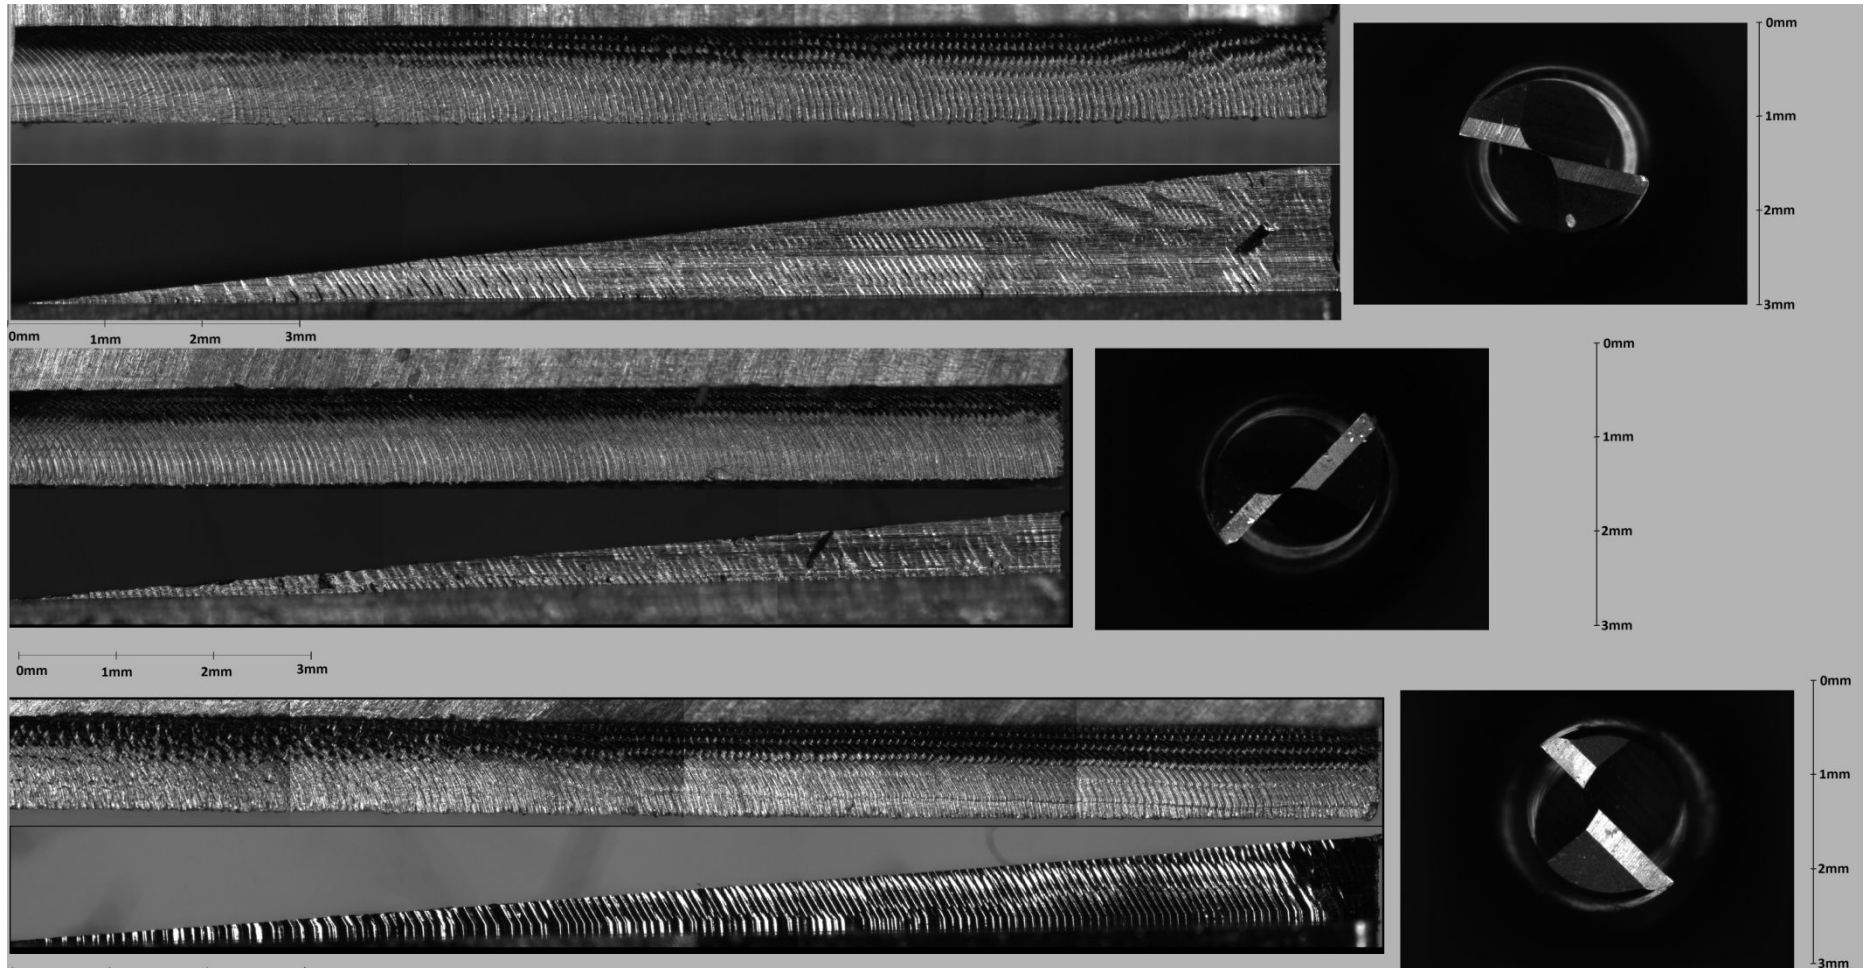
Ramp test surfaces and tested tools. Top: Unused tool with one rake Middle: Chipped tool with one rake Bottom: Unused tool with two rake
